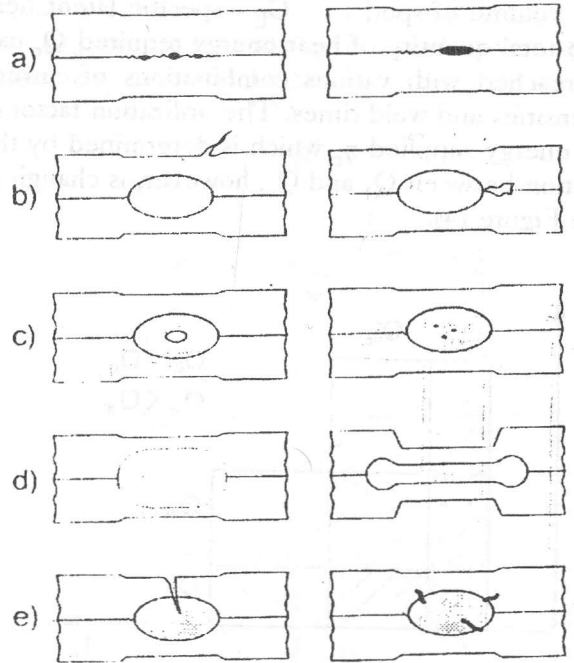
Characteristic defects occurring in resistance spot welding
